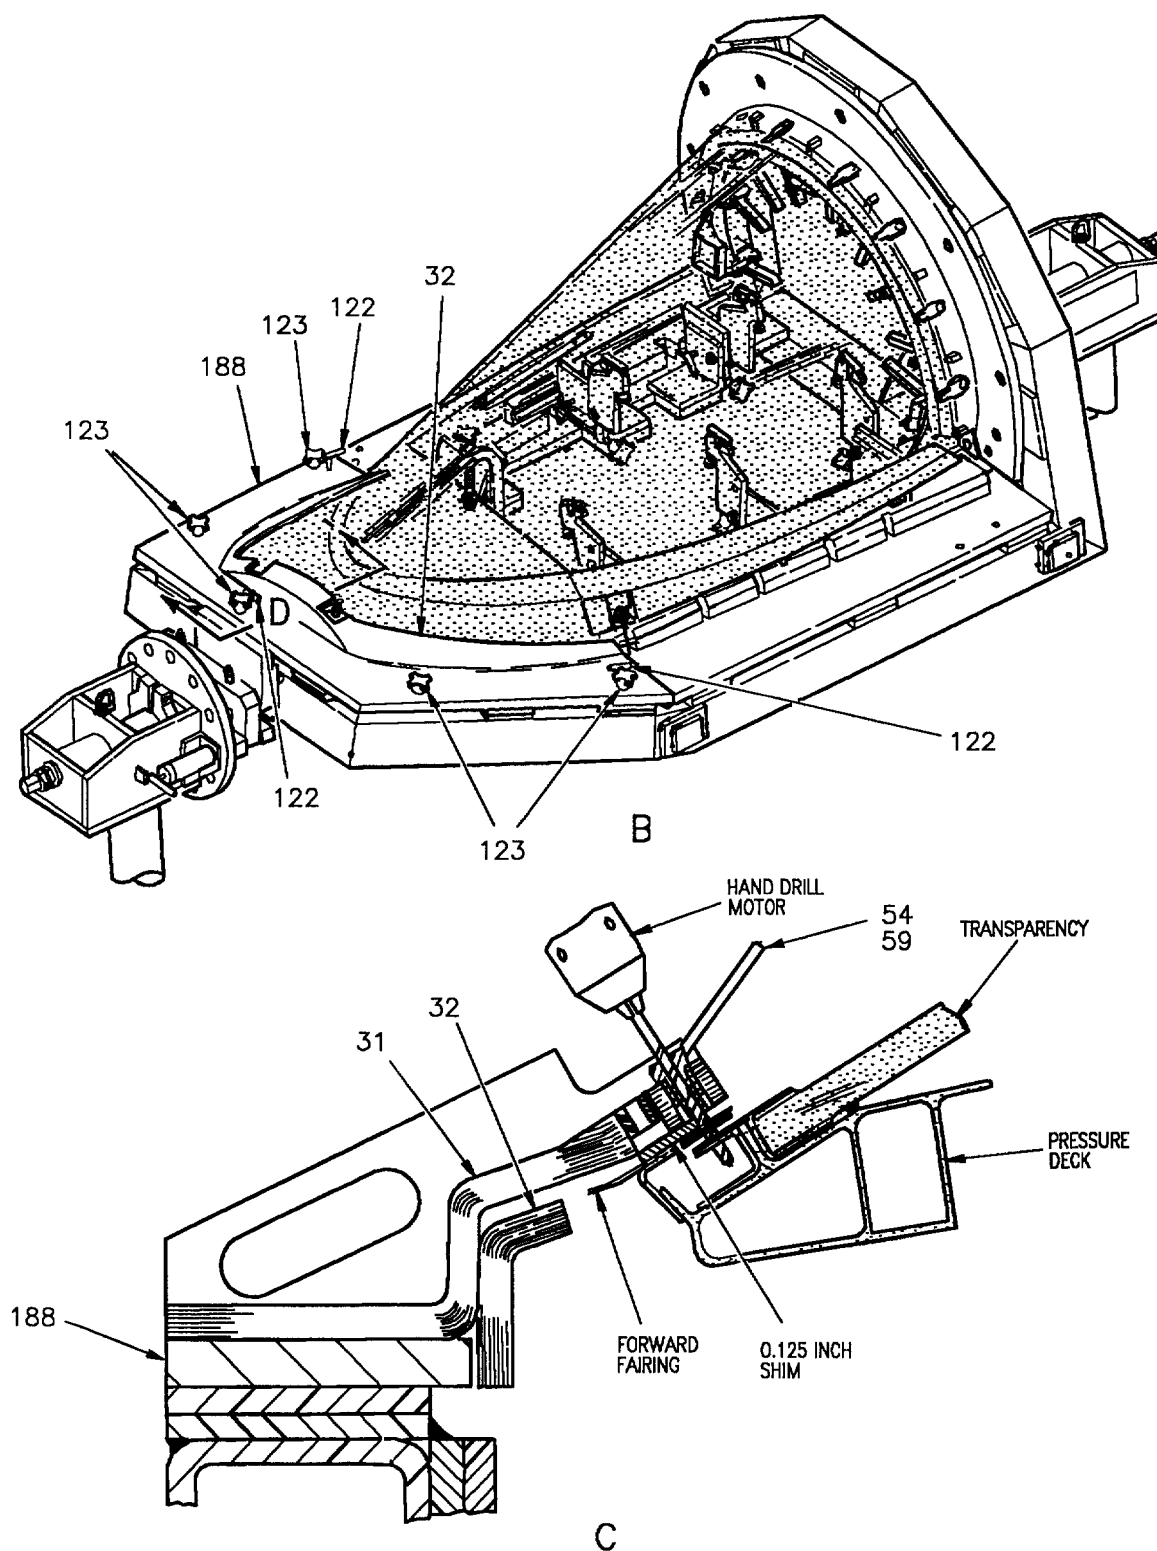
Inspection or Replacement - Forward Fairing (Sheet 2)
